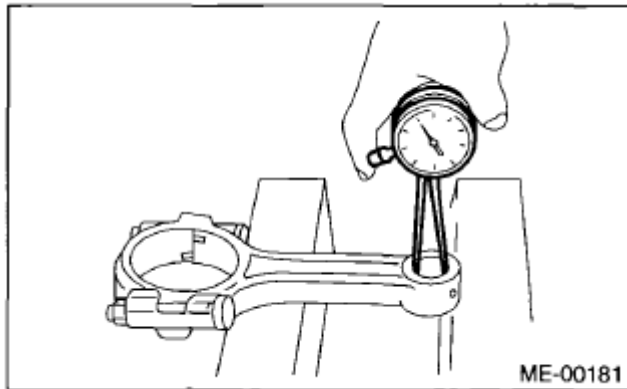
Checking Clearance Between Piston Pin And Bushing
